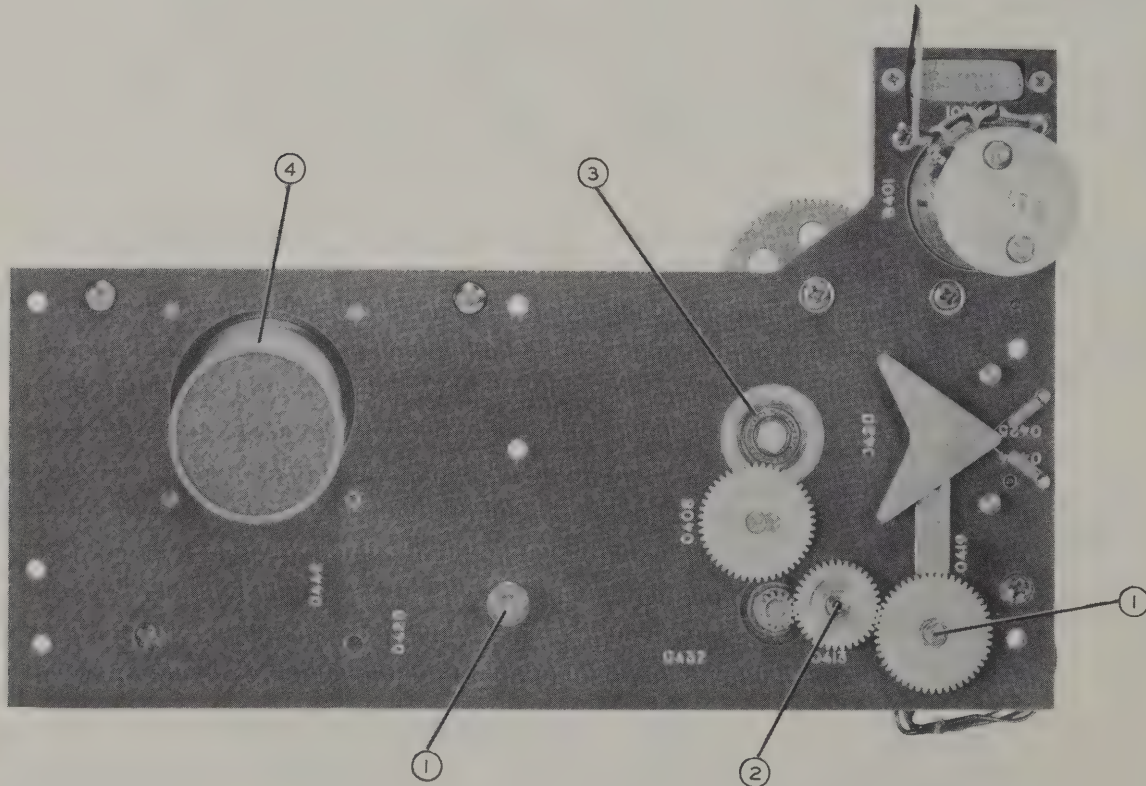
Variable Inductor Subassembly, Top View with Drums Removed, Lubrication Points
